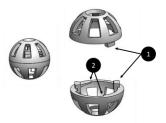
CAD drawing tissue holder: Two identical halves from a ball with 1. claws and 2. lugs.
